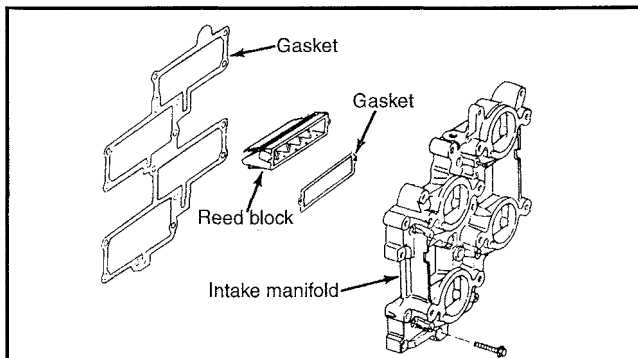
Exploded view of a typical intake manifold and leaf valve used on 90° LV4 and LV8 motors
